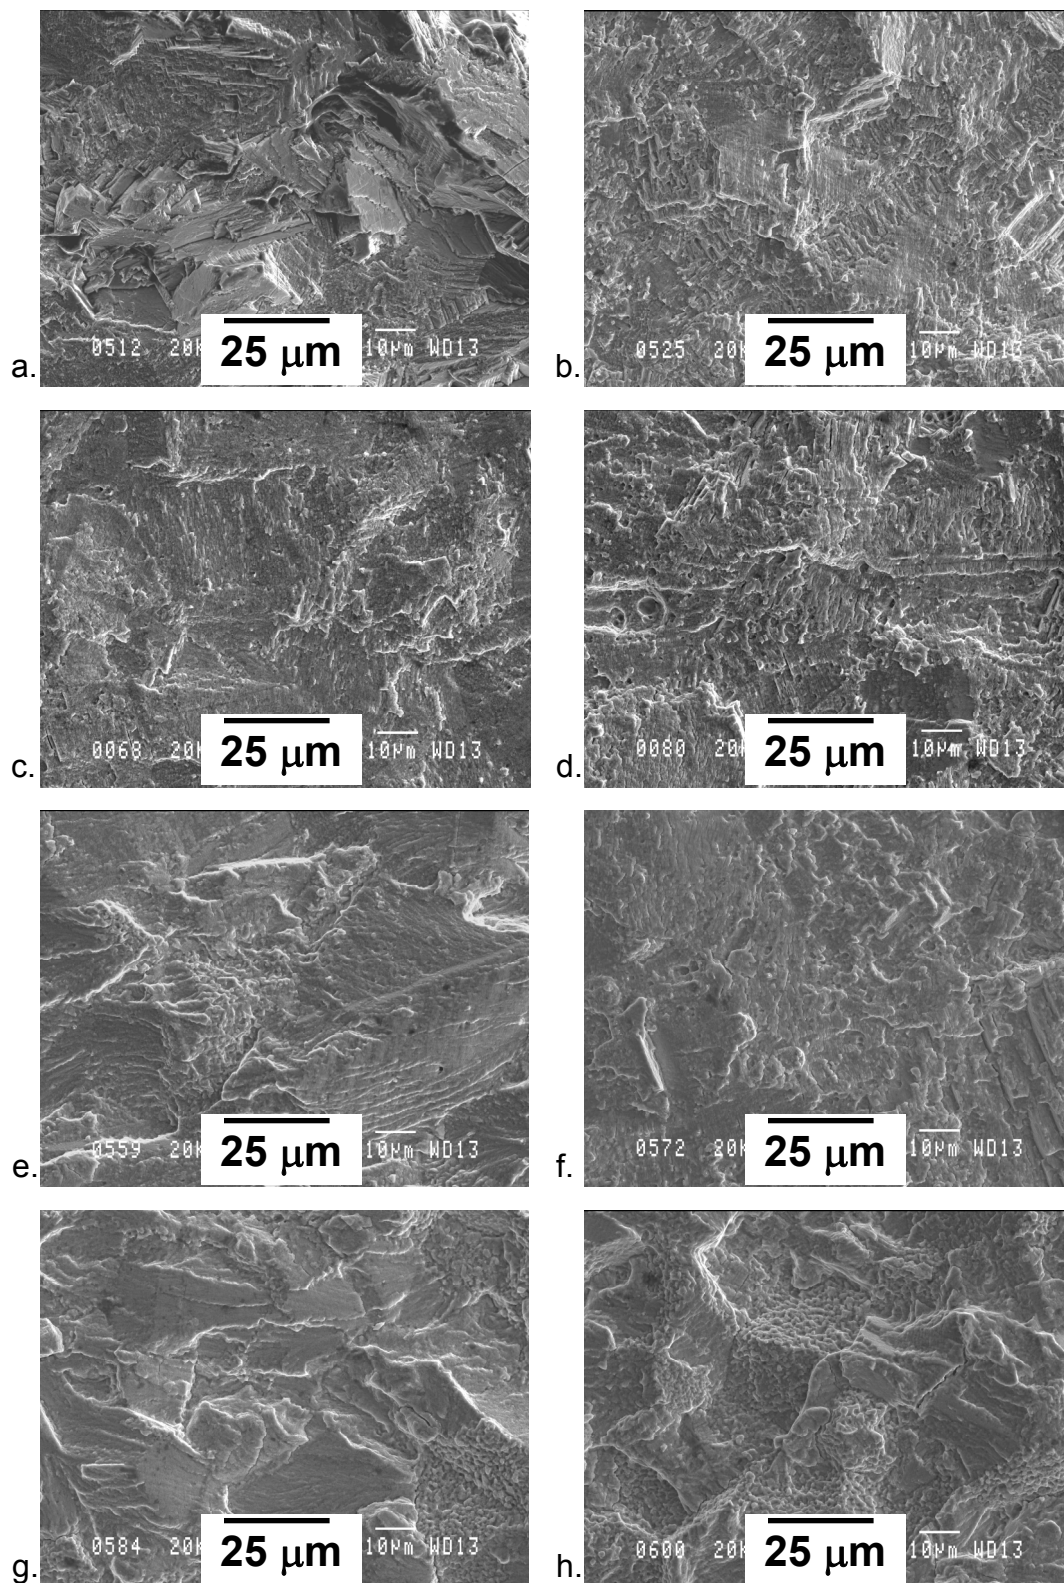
Fatigue cracking of supersolvus cyclic fatigue crack growth specimens tested at:
